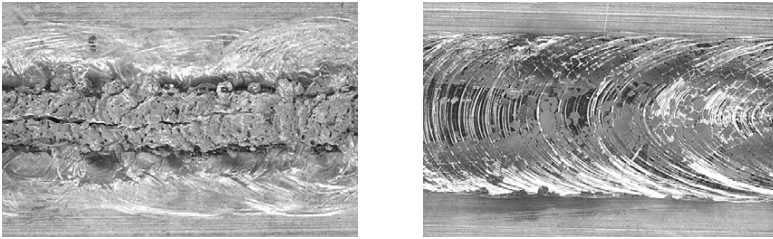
Nd:YAG laser welding; left: CO₂ shielded surface; bead on plate; EN AW-6060; $P_{Nd:YAG} = 3 \text{ kW}$; $f = 150 \text{ mm}$; $\varphi = 20^\circ$; CO₂ flow 25 L min^{-1} ; $v_w = 2 \text{ m min}^{-1}$; right: argon shielded surface; bead on plate; EN AW-6060; $P_{Nd:YAG} = 3 \text{ kW}$; $f = 150 \text{ mm}$; $\varphi = 20^\circ$; argon flow 25 L min^{-1} ; $v_w = 1.5 \text{ m min}^{-1}$
